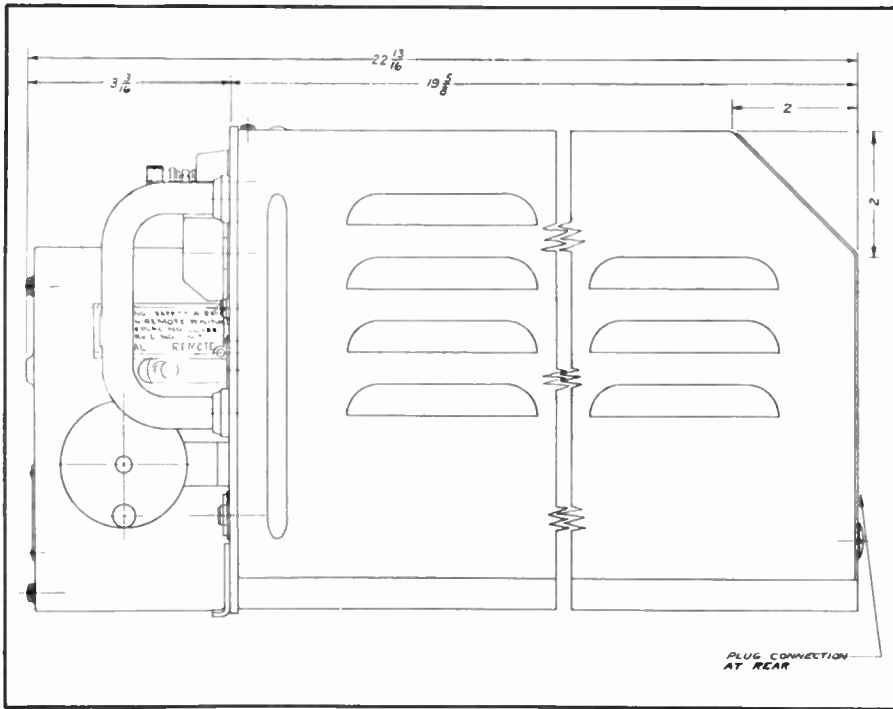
SIDE VIEW OF THE COMPLETE UNIT, EXCEPT FOR THE MOUNTING BASE. NOTE THAT THE DRAWING HAS BEEN FORESHORTENED. DIMENSIONS SHOW DEPTH
